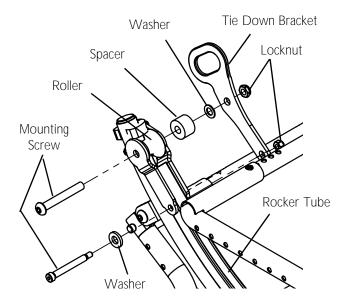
Install New Transport Brackets - 12-16 Inch Deep Seat Frames.
